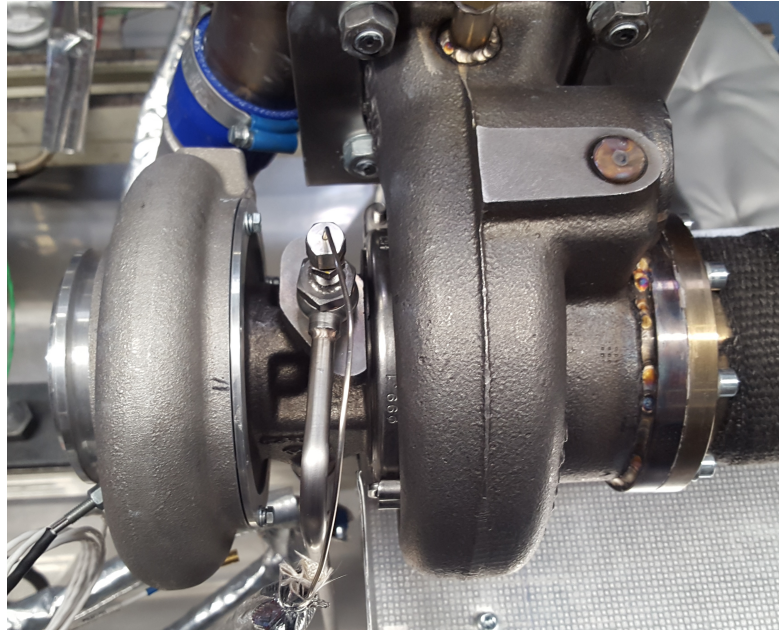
TD07 Cartridge modified to fit a TD06H compressorwheel and compressor cover
